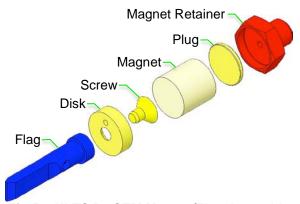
HLTS BOSEM Magnet/Flag Assembly
